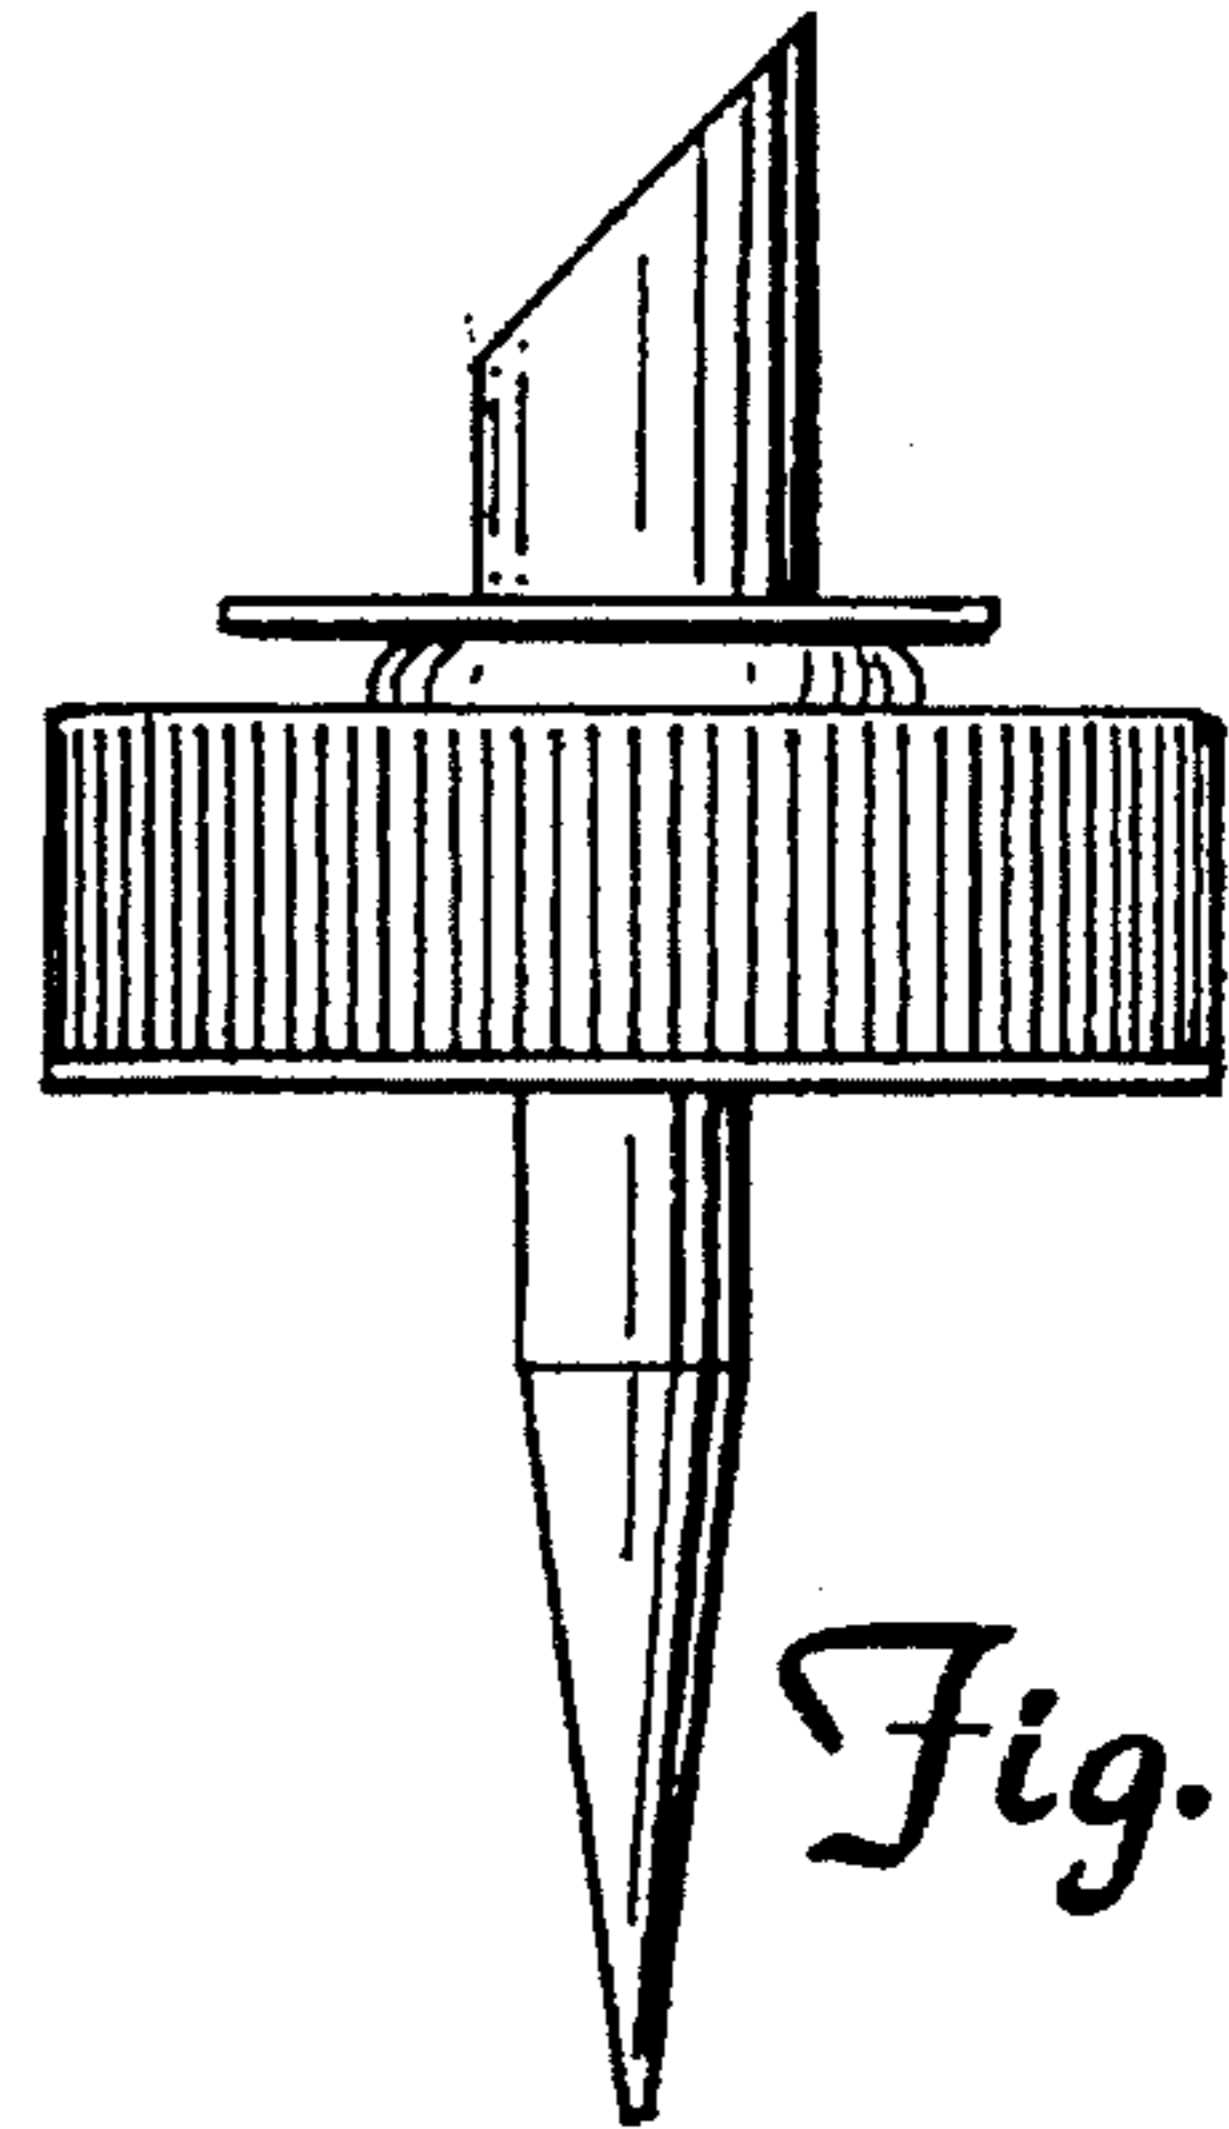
is a perspective view of the combined bottle cap and pipette, showing my new design;
